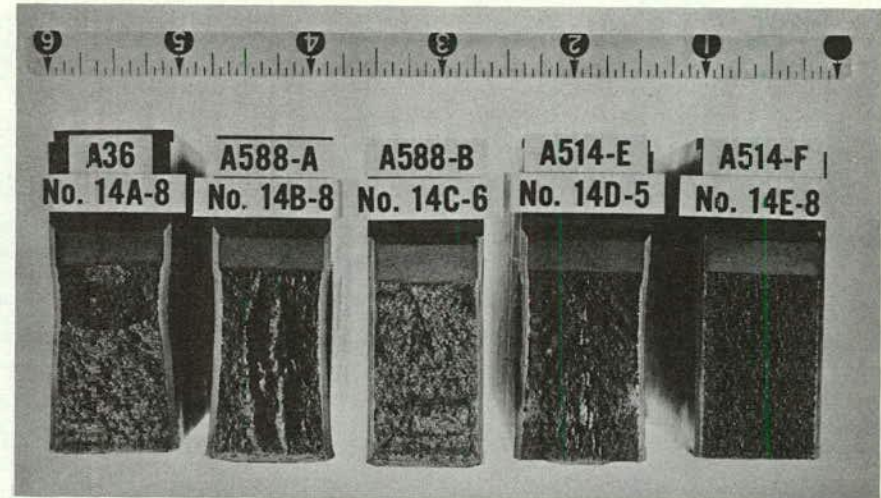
Typical fracture surfaces from precracked cantilever beam specimens tested to fracture under static loading conditions in air at 72 F.
